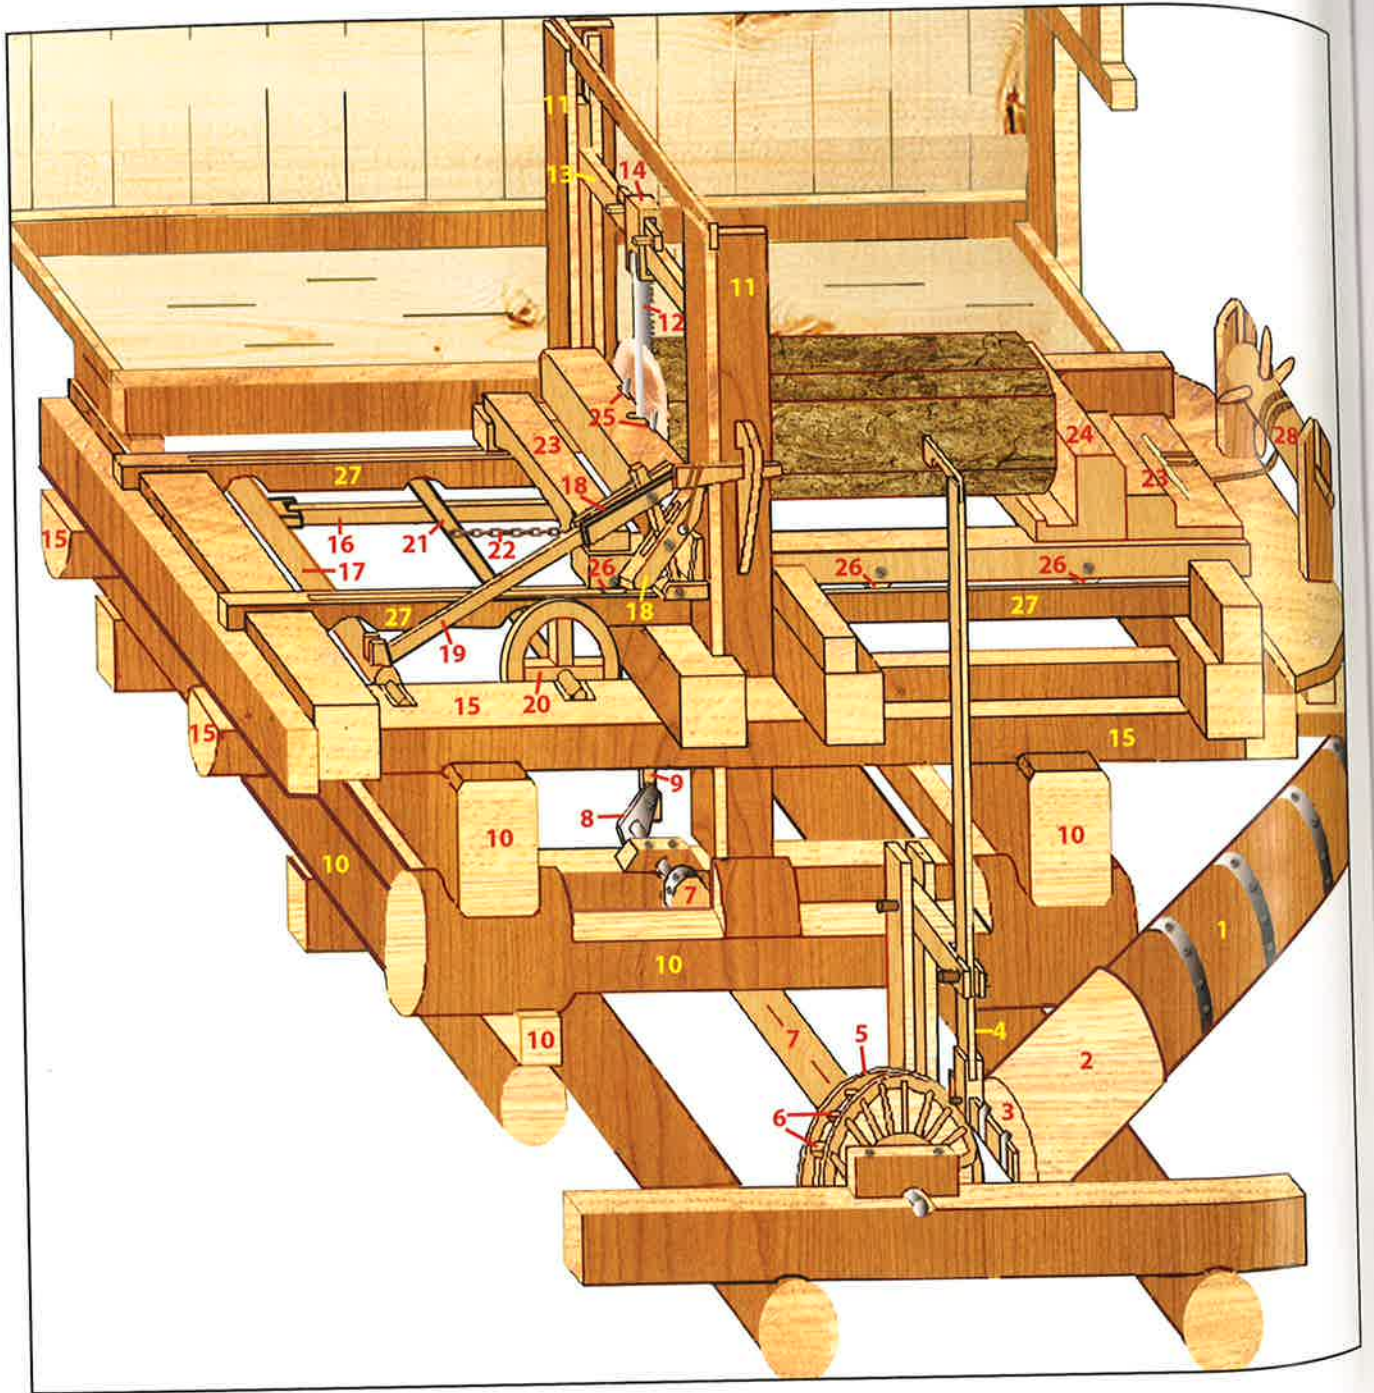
Forestry water sawmill mechanism, drawing by F. Dasoulas.
